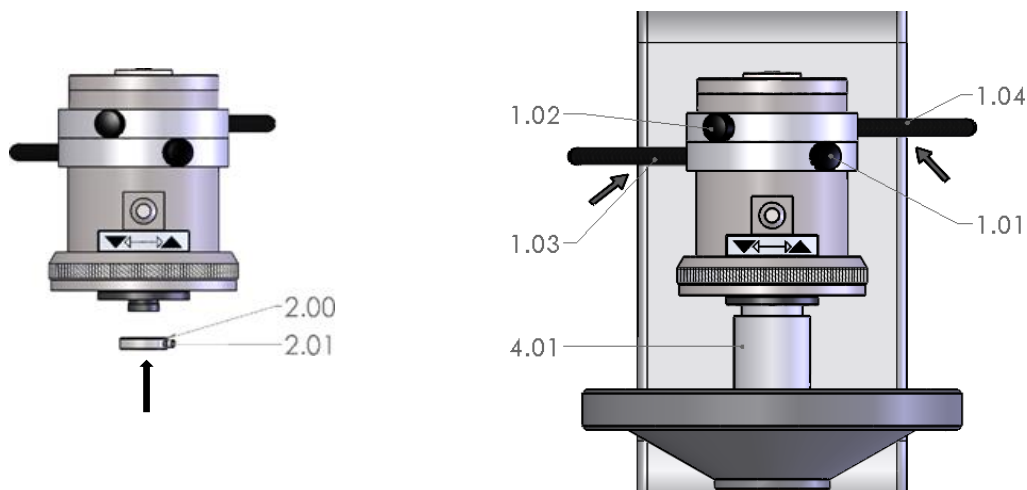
INSTALLATION OF ADAPTER HULL FIG. 2 INSTALLATION MEASURING DEVICE
